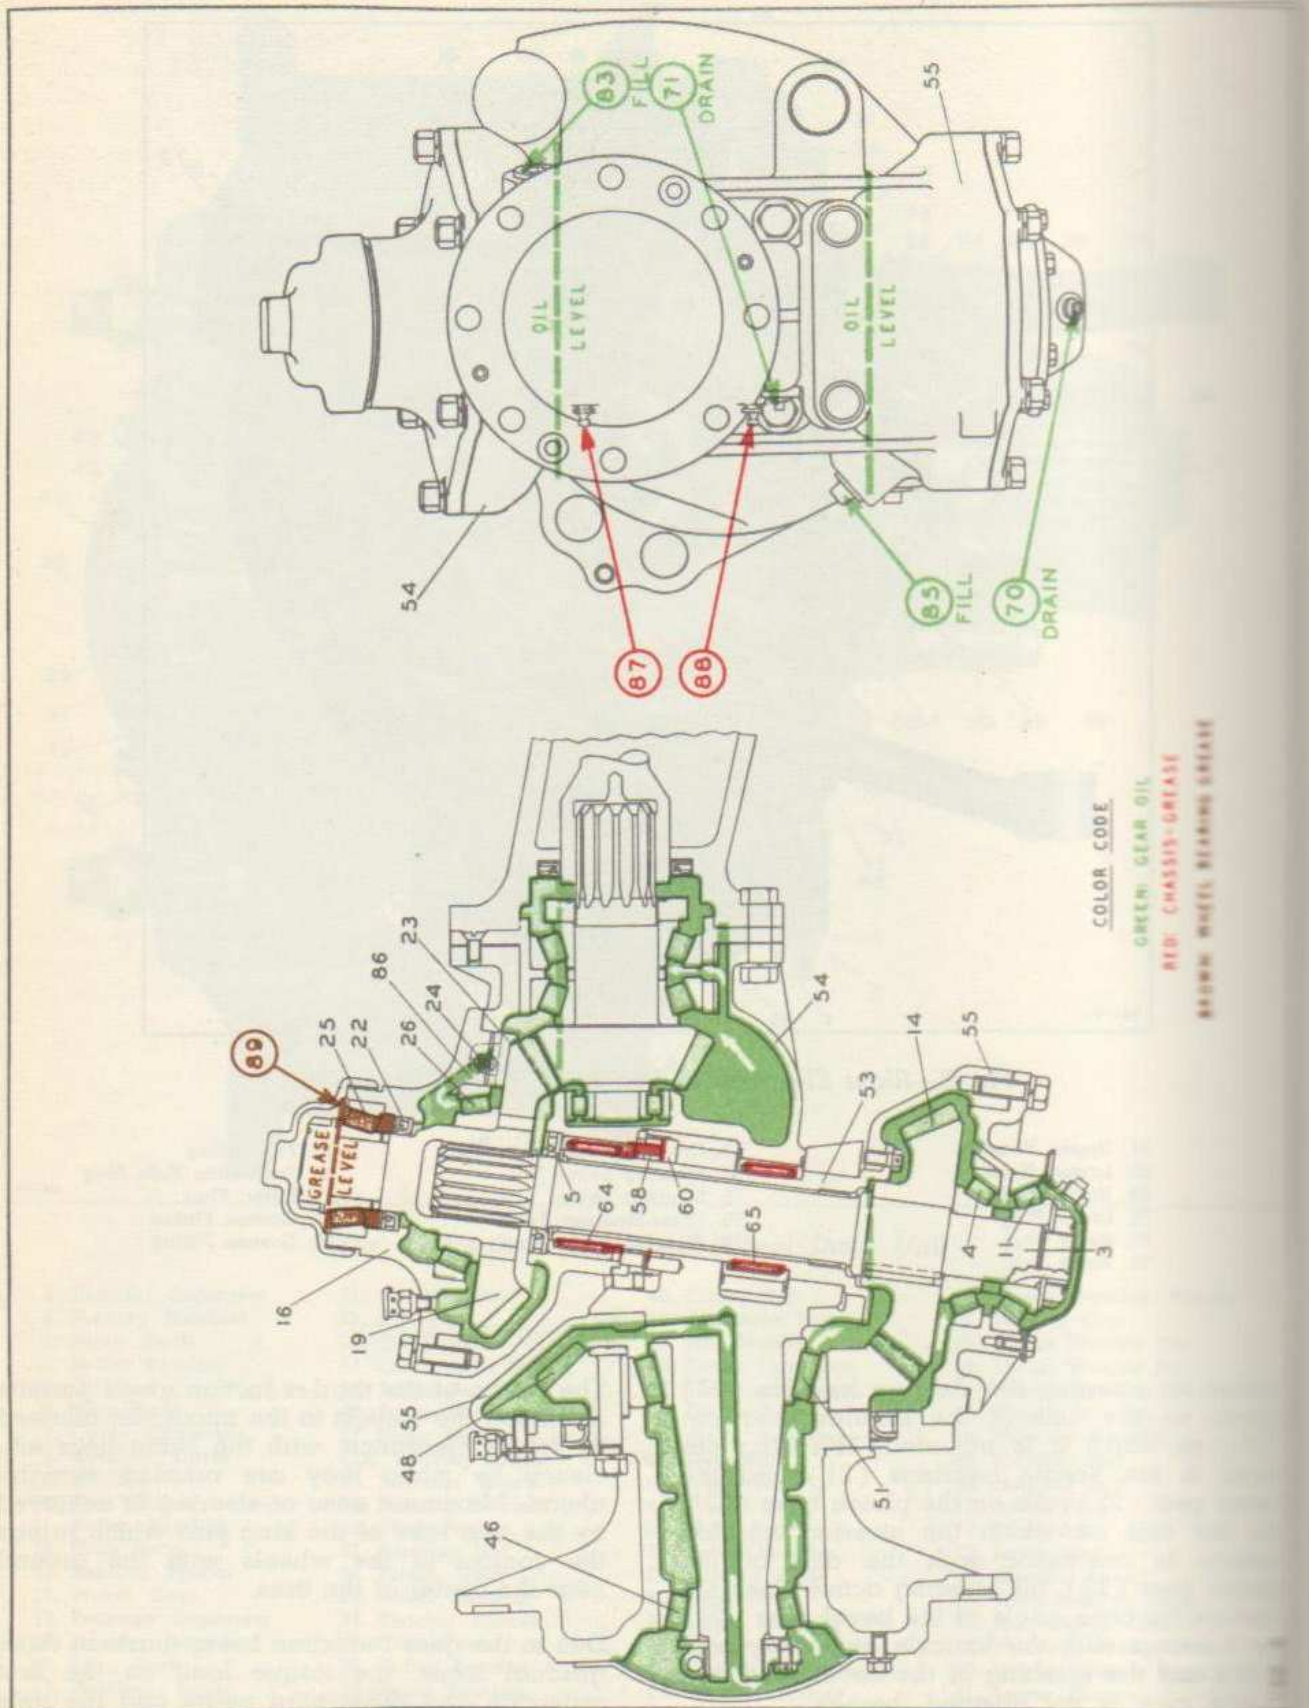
Right Elevation of Left Hand Wheel Drive Unit
